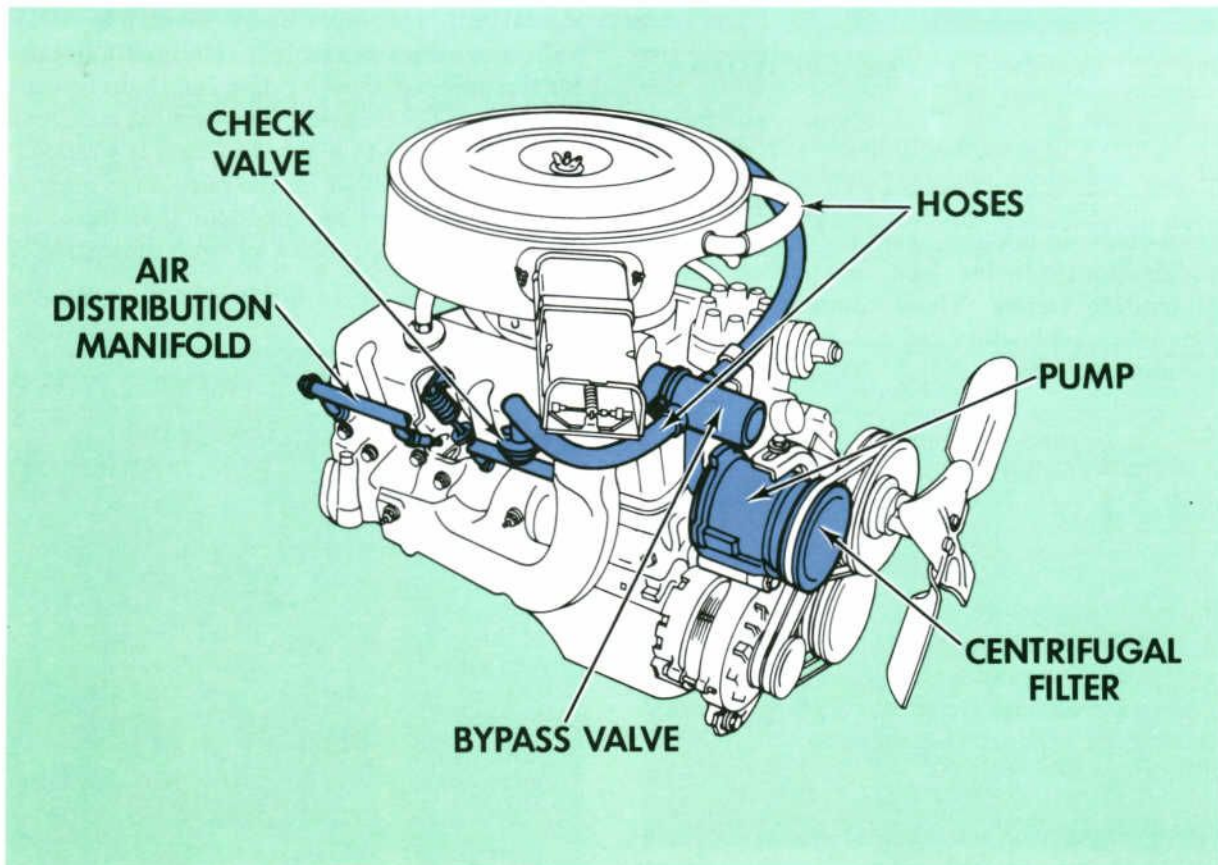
THERMACTOR AIR INJECTION EQUIPPED ENGINE
